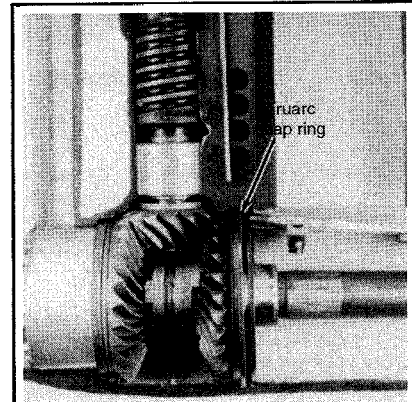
On cross-flow motors with 4 bolt carriers, snaprings secure the bearing retainer plate, which must be removed for further disassembly...
